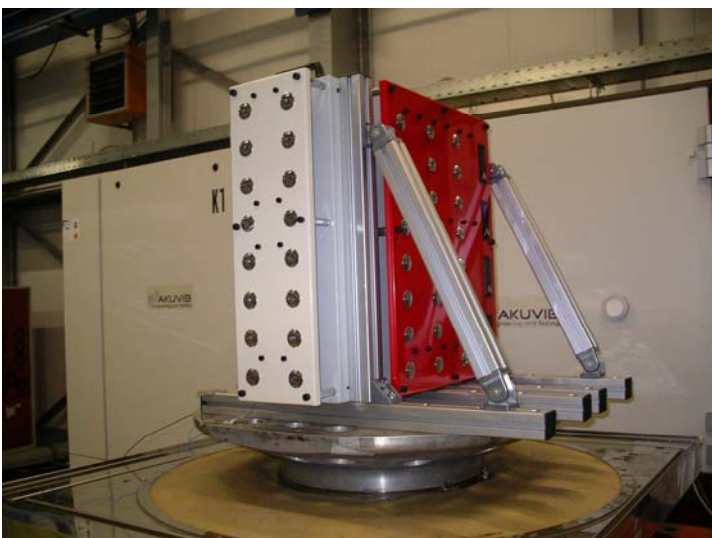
specimens undergoing the vibration and shock test in vertical direction
